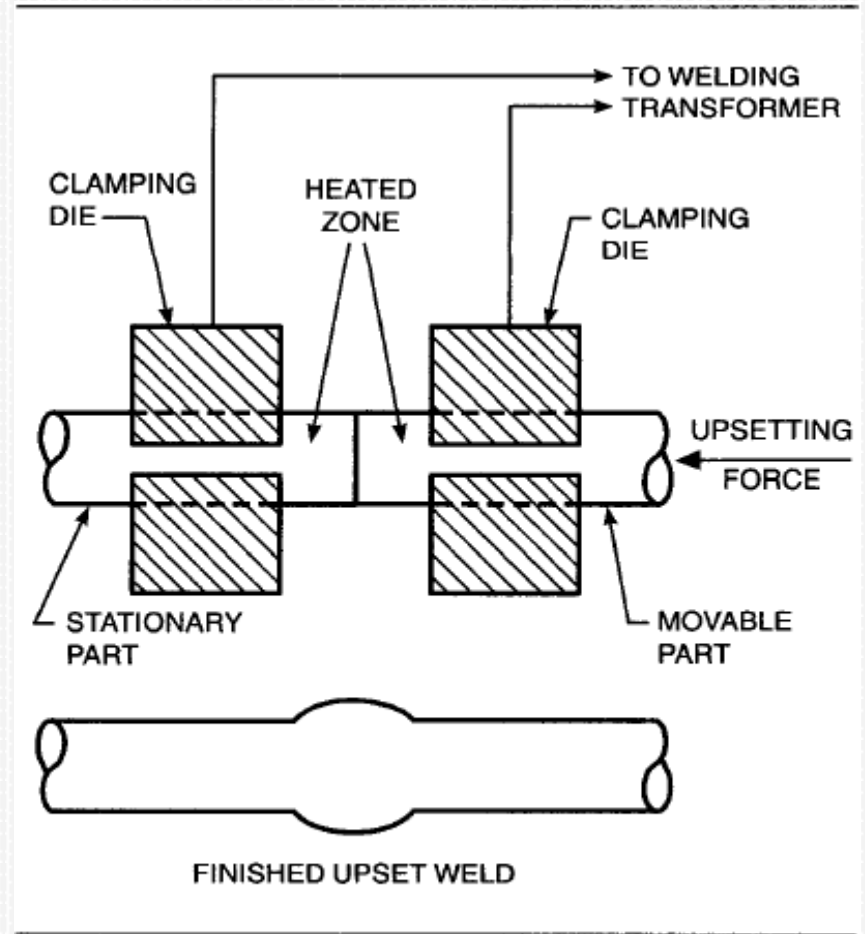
General Arrangement for Upset Welding of Bars, Rods, and Pipes
